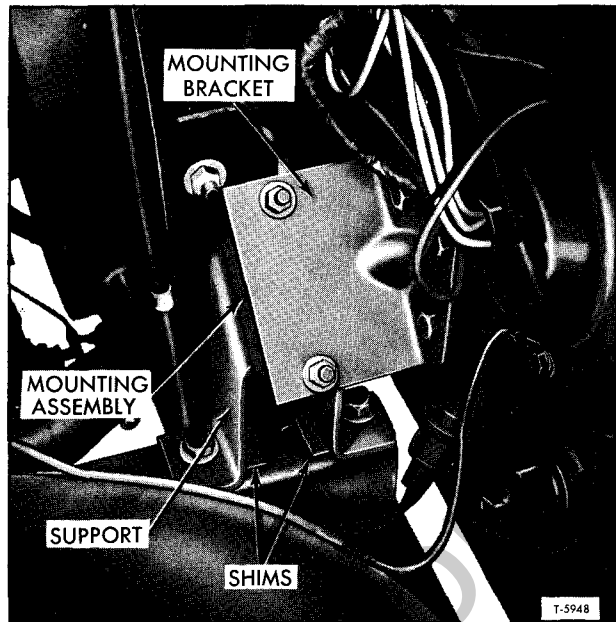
Radiator Shell Flexible Mounting (Typical for HM and JM80)
